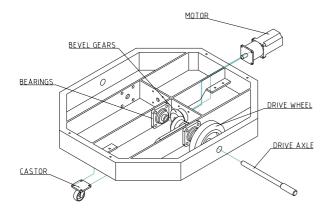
The internal supporting structure of the chassis into which the drive components are assembled.
